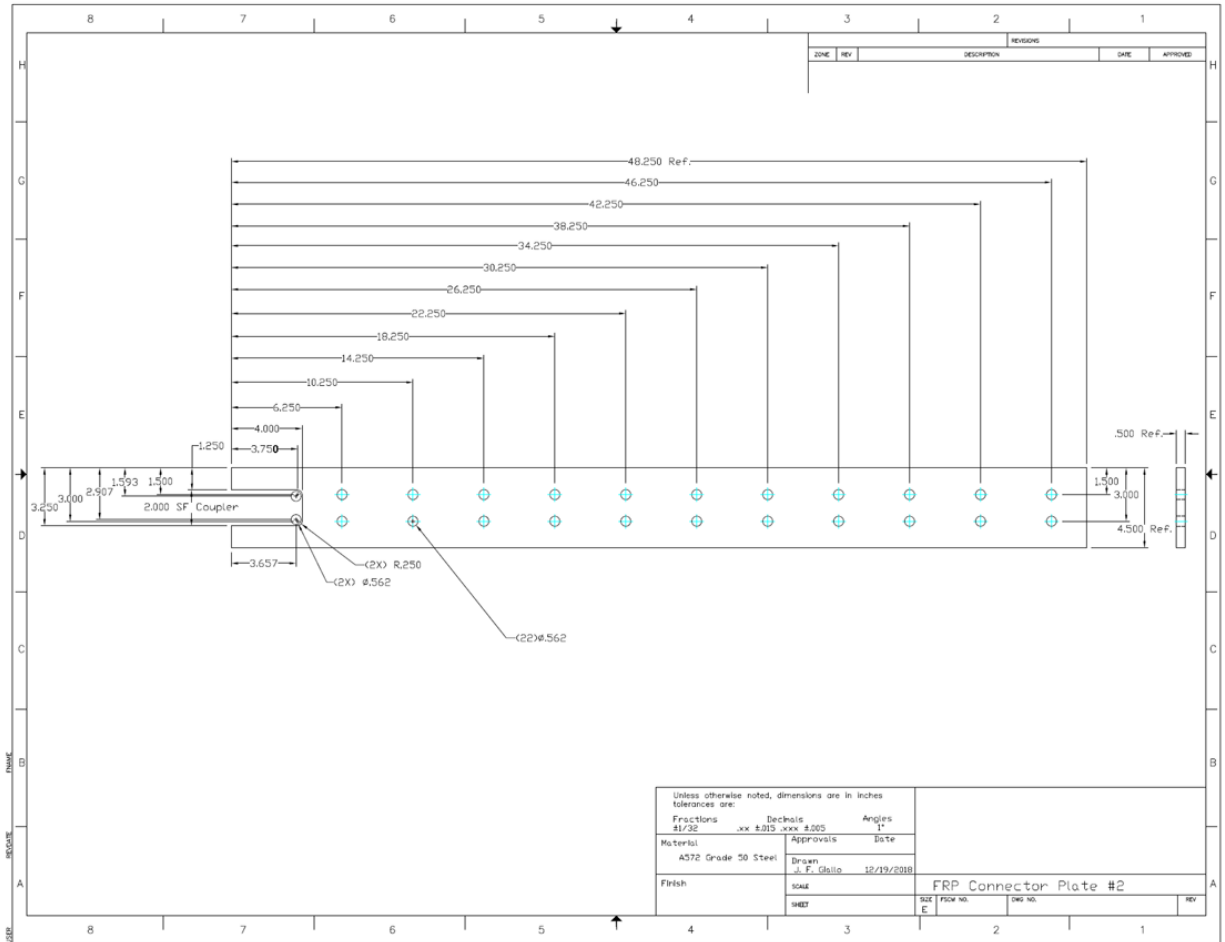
FRP connector plate 2 machinist as-built drawing.
